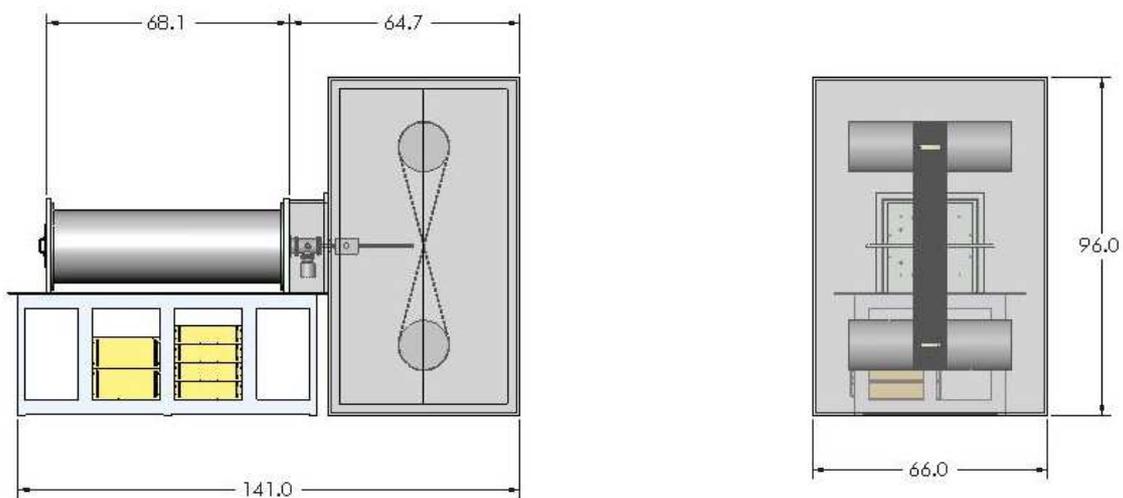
An alternate variant on the size and positioning of the wire and capstan assembly.
